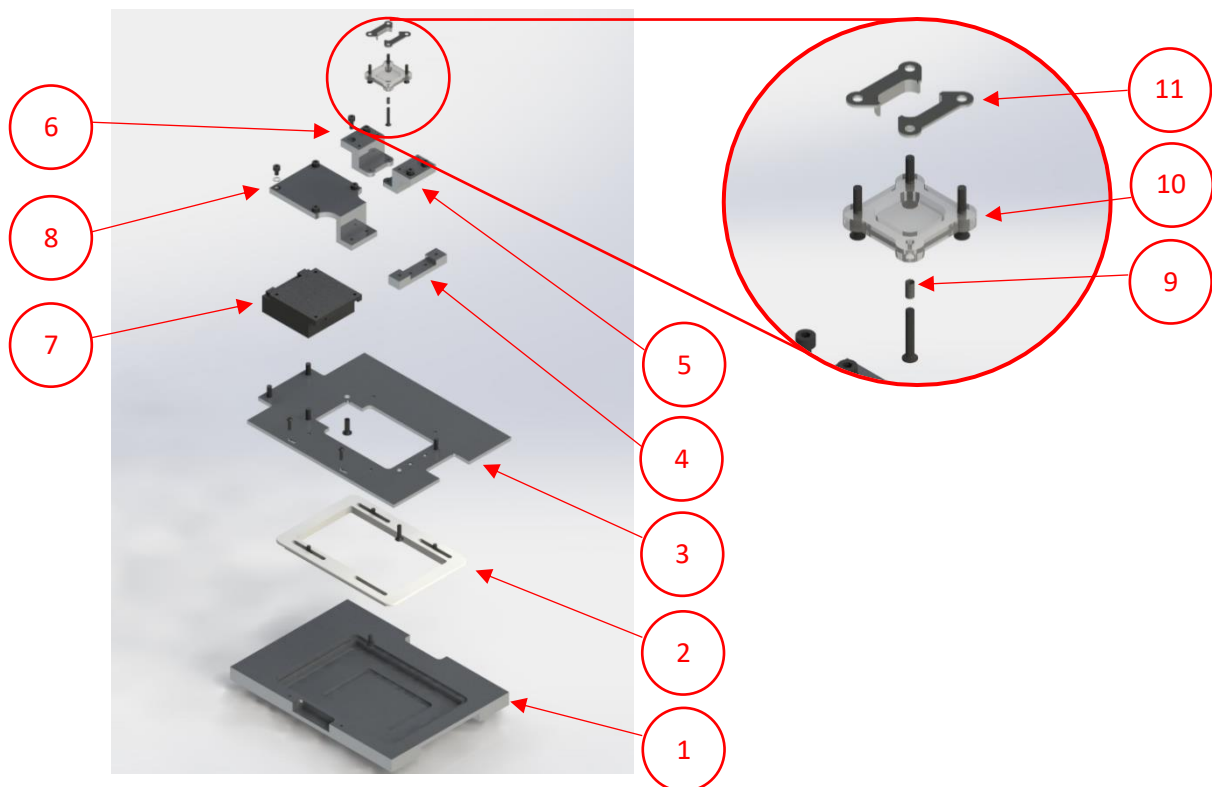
Design of tension system of mechanical cell loading device (exploded view) and close-up of PDMS membrane
